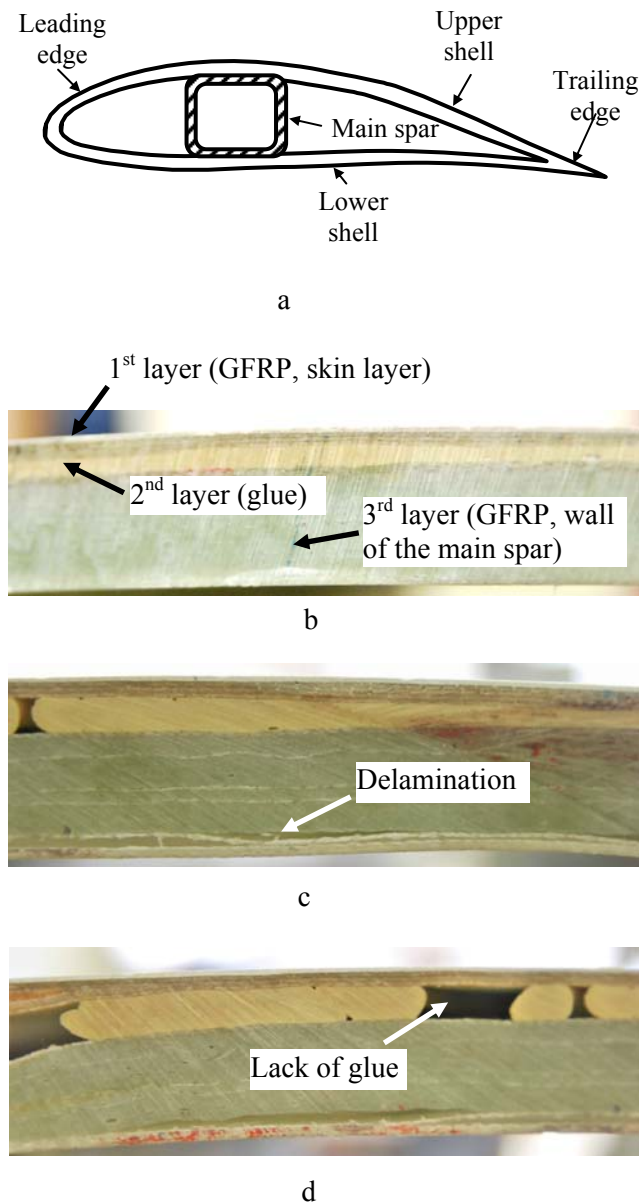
The views of the wind turbine blade cross-sections: a - typical cross section, b - main spar cross- section without defects, c - main spar cross- section with delamination, d- main spar cross- section with lack of epoxy glue
